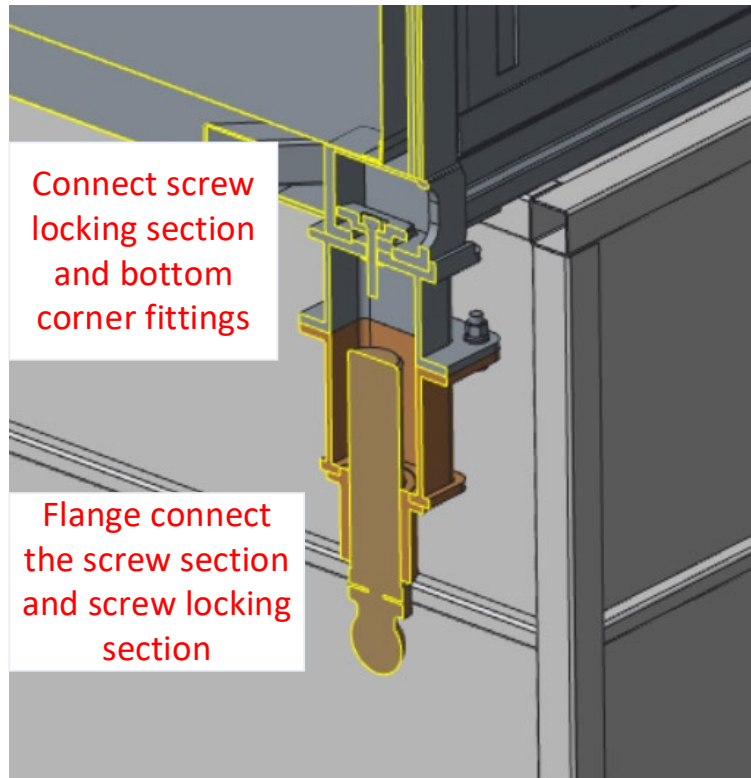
Install Mounting Base onto Container Bottom Corners
